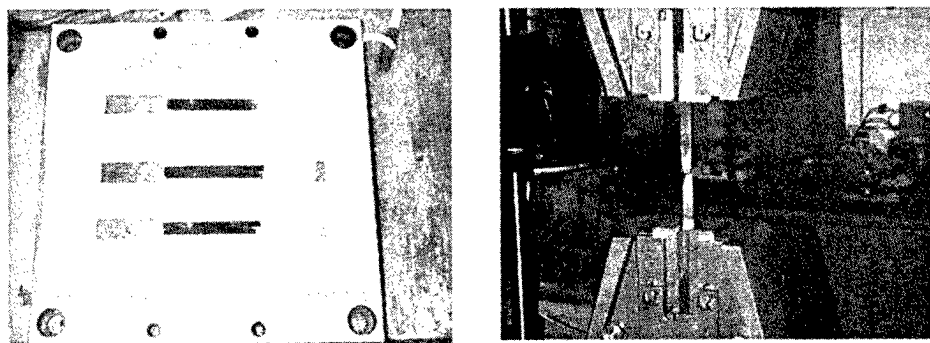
Tension test specimens fabricated by 3D Welding and Milling
